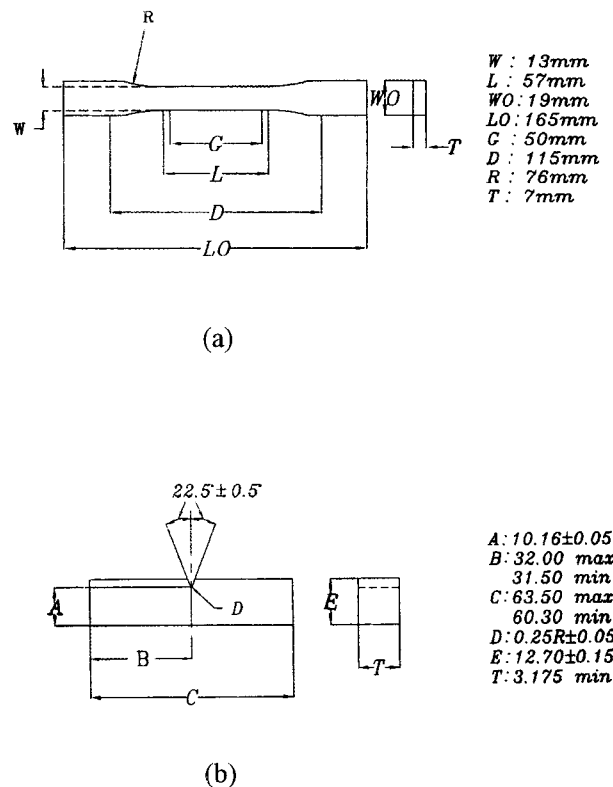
Standards of the (a) tensile and (b) impact specimen.
